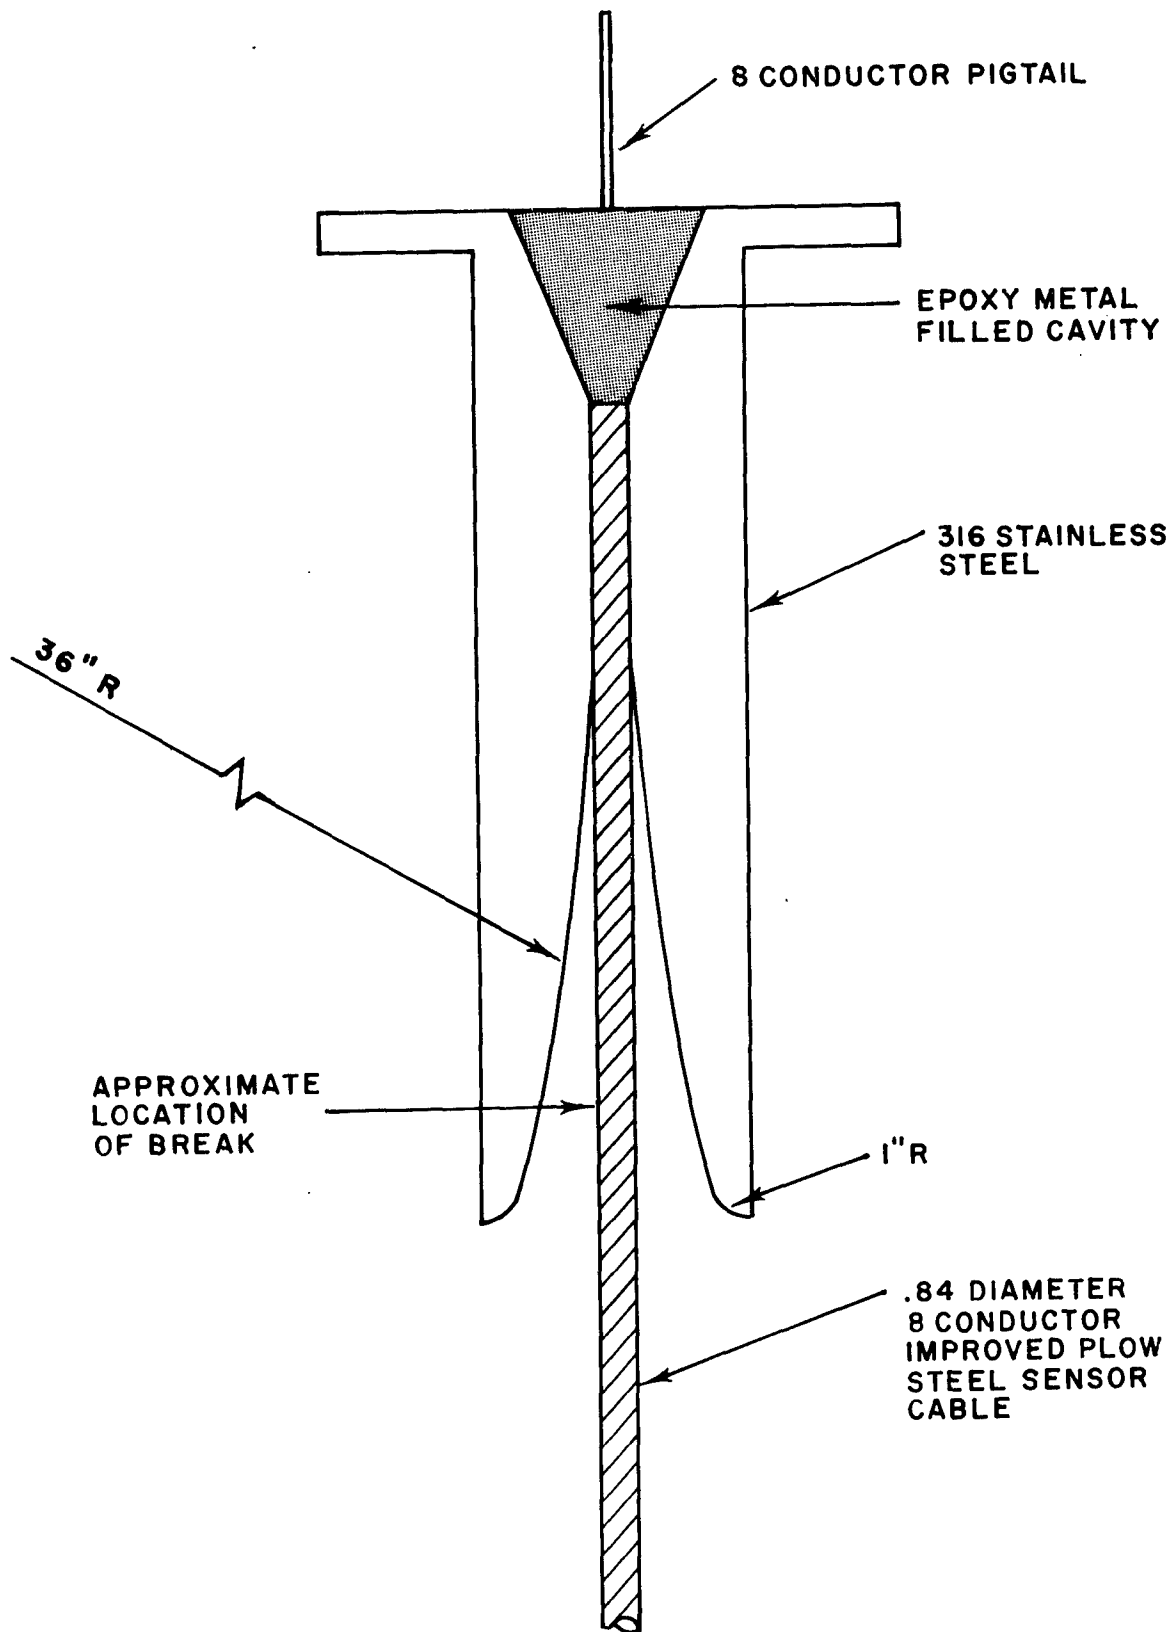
SENSOR CABLE BELL MOUTH HOUSING
